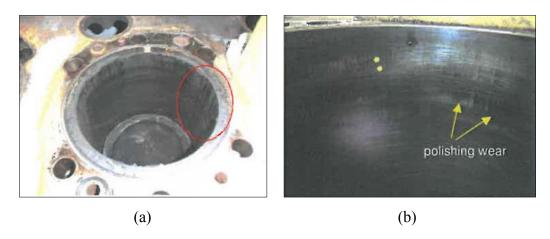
Carbon deposits and polishing wear in cylinder liner. Picture (a) shows carbon deposits in cylinder liner and picture (b) shows an enlargement of the red circle in picture (a). Courtesy of [25]
